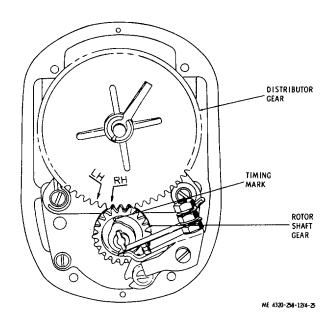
Distributor gear properly alined with rotor shaft gear.
